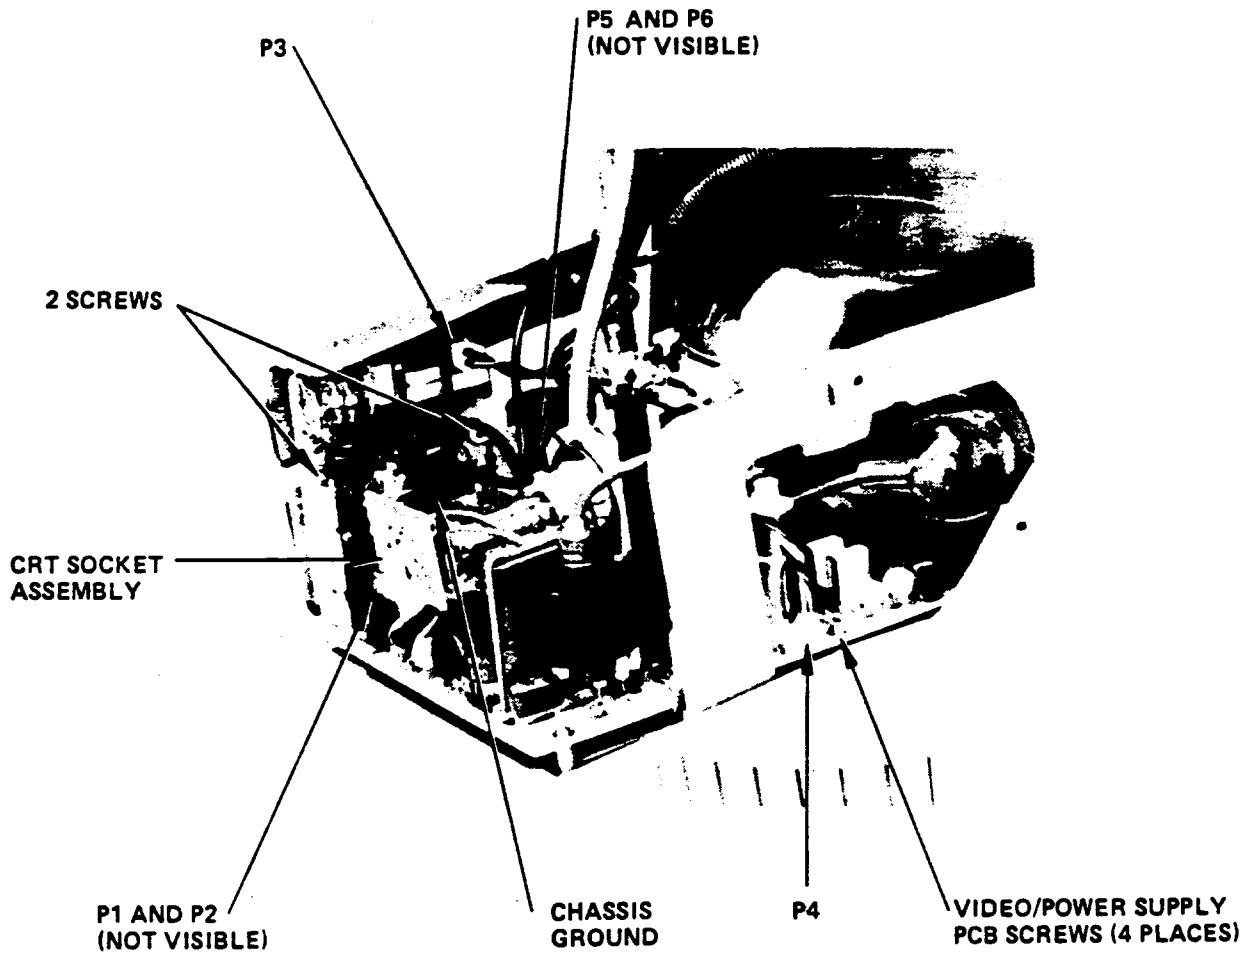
Removal of the Video/Power Supply PCB and the Power Supply Control PCB
